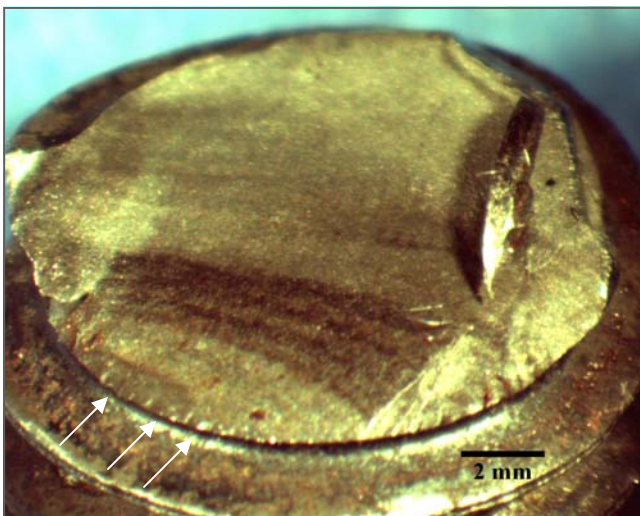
Fatigue Fracture Surface on a Bolt Showing Crack Initiation at the First-engaged Thread
